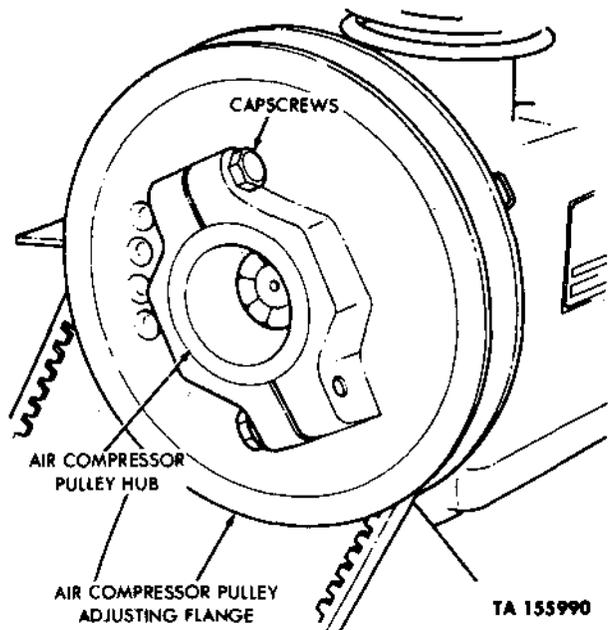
Loosening or tightening pulley adjusting flange screws.
